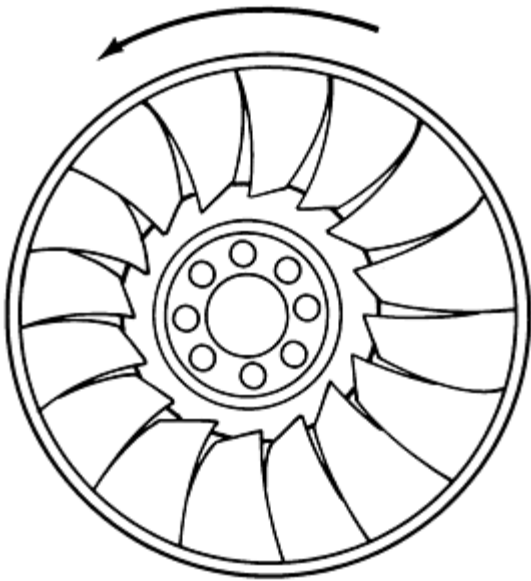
Typical surface fatigue wear produced by cavitation in a pump impeller component
